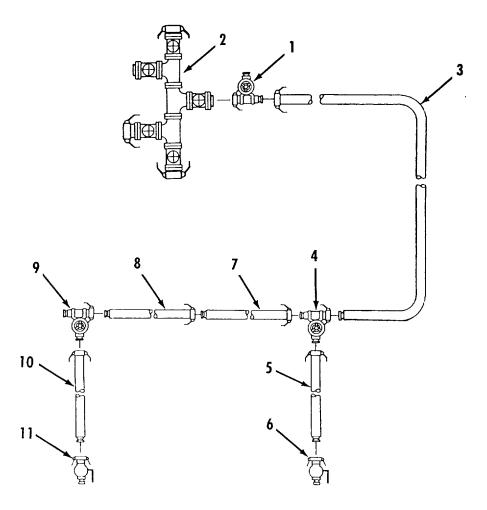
Fuel System - Fueling Manifold with Five Valves to Bottom Loading Points.
